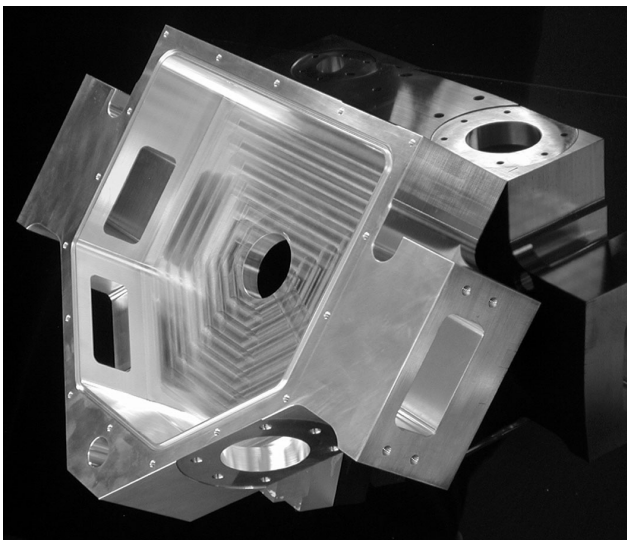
Part made from a solid block of aluminum using the CNC machine.
